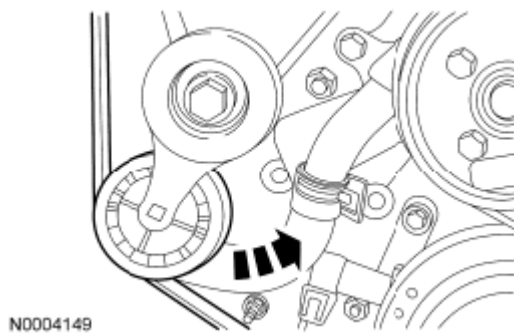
Rotating Accessory Drive Belt Tensioner Counterclockwise
